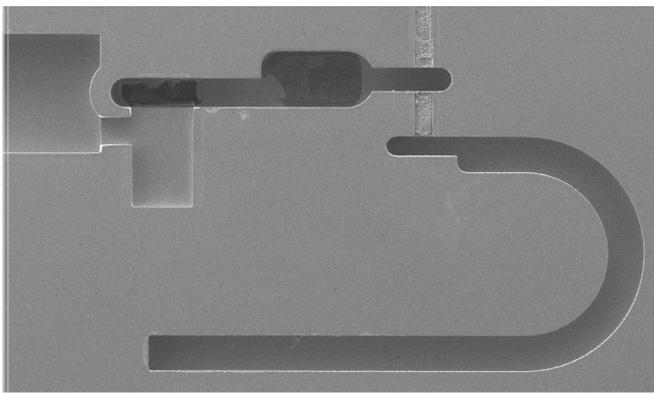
SEM picture of silicon micromachined waveguide components fabricated for the 600 GHz heterodyne receiver front-ends. The smallest dimensions in the fabricated part are the 75 μm by 75 μm waveguide section.
